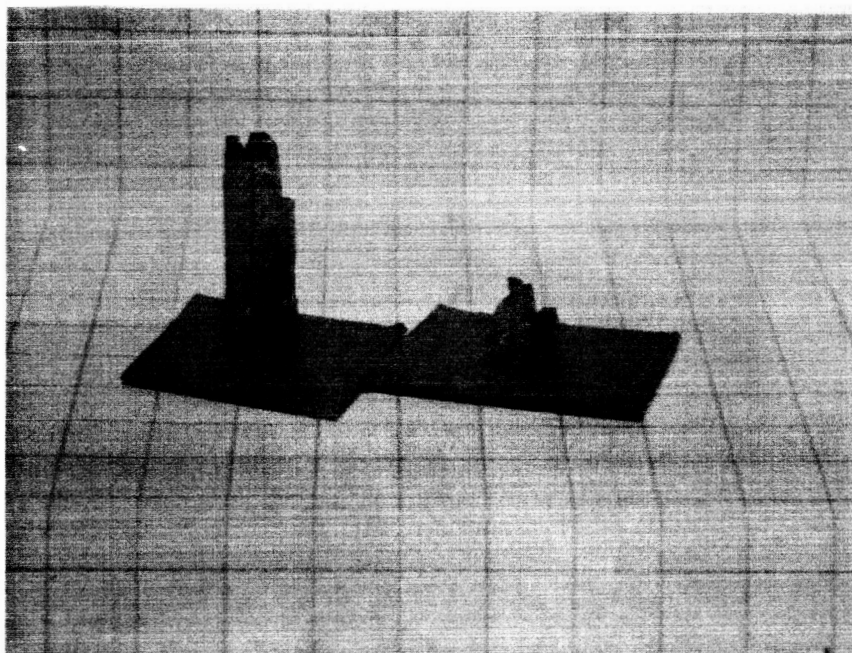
COMPRESSIVE TEST SPECIMEN OF 80.7 Zr SHOWING
